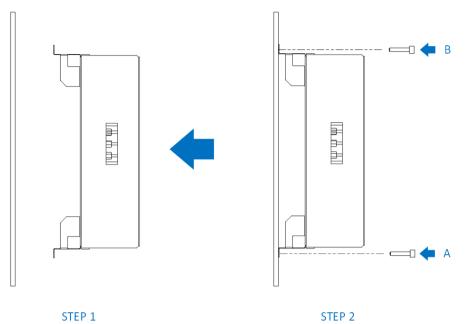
Mechanical Mounting of Capacitor Module for a Wall Mount
